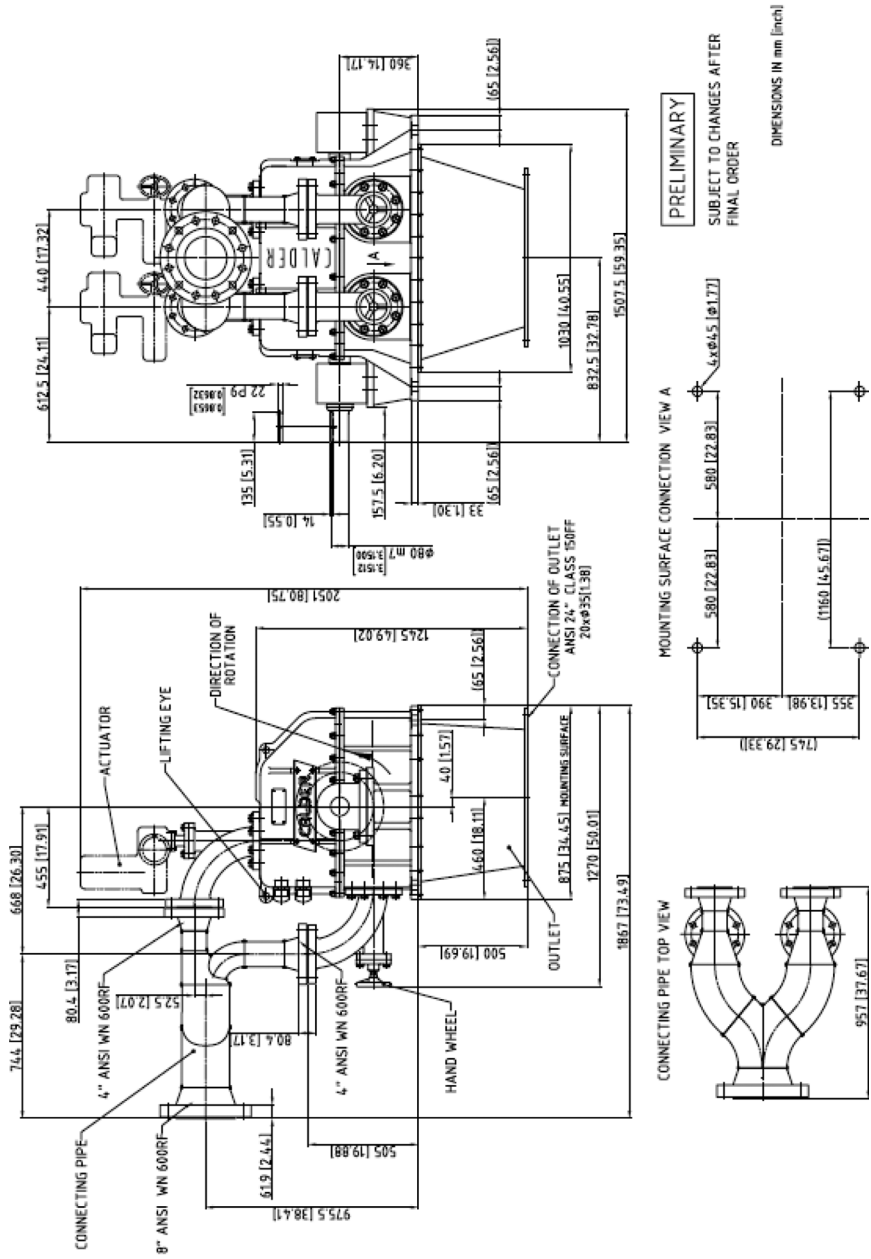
Engineering drawing of Pelton wheel equipment (courtesy of Calder Corporation).
